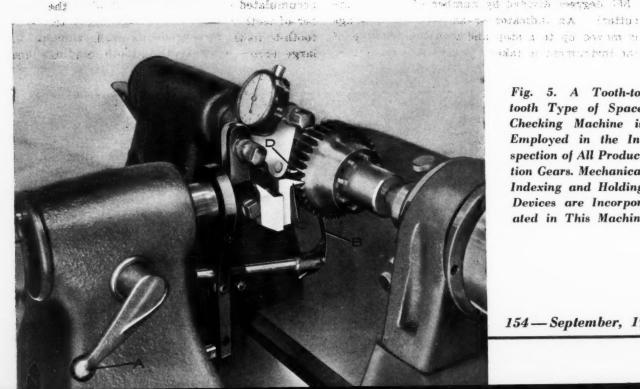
A Tooth-totooth Type of Space Checking Machine is Employed in the Inspection of All Production Gears. Mechanical Indexing and Holding Devices are Incorporated in This Machine
